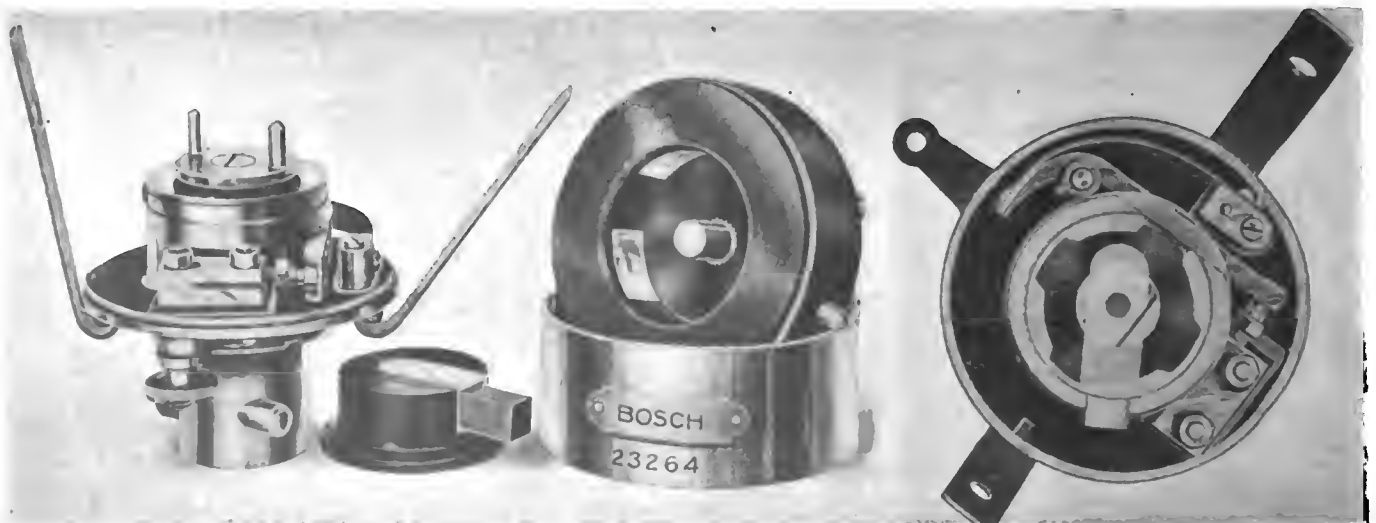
Timer distributor parts, partially disassembled. Fig. 3 Contact breaker and cam, with operating lever of sheet metal.
